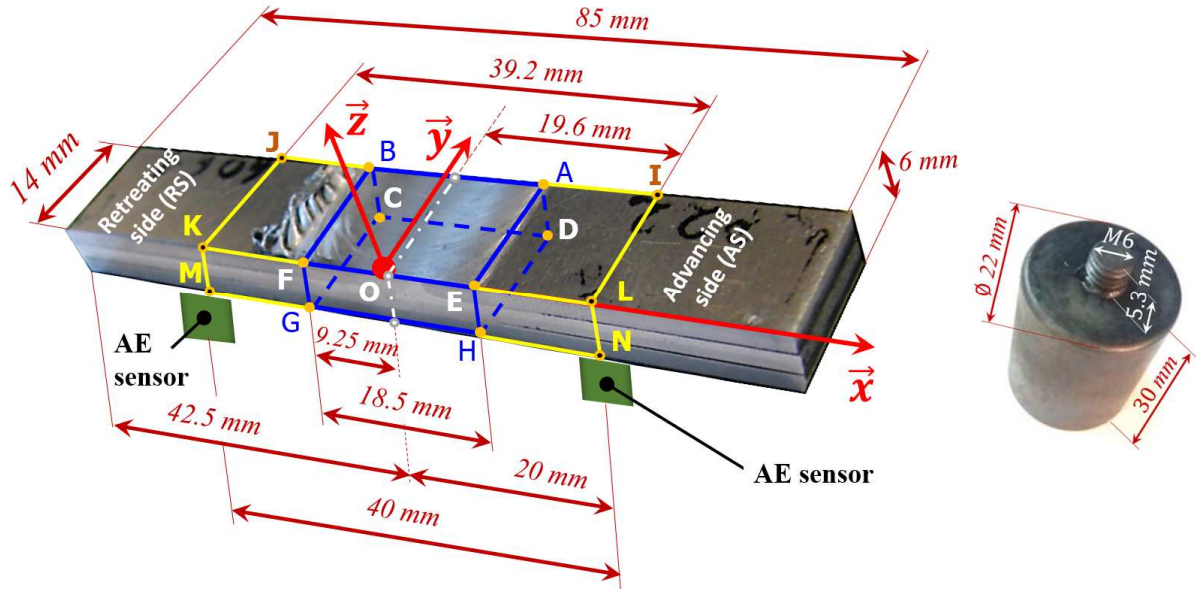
Geometry of the FSW specimen with details of the investigated areas and the tool
